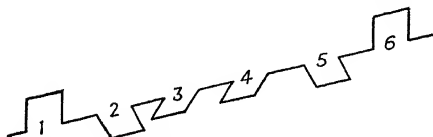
Conventional crank-arm arrangement in the six-cylinder in-line engine.
